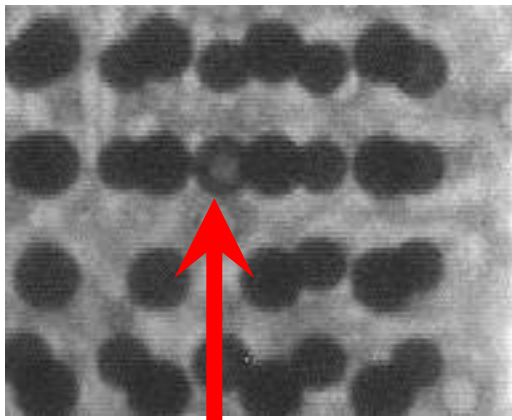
Similar BGA solder joint with microvia on ENIG finish.
